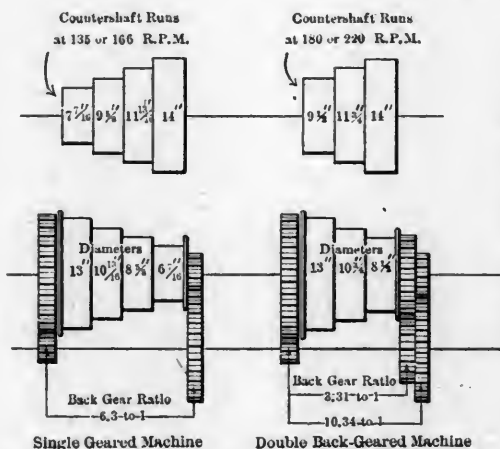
BACK-GEAR RATIOS FOR SINGLE AND DOUBLE BACK-GEARED MACHINES.
